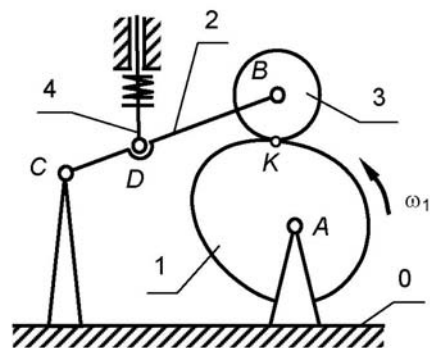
The model of a flat cam mechanism with a rocker follower
